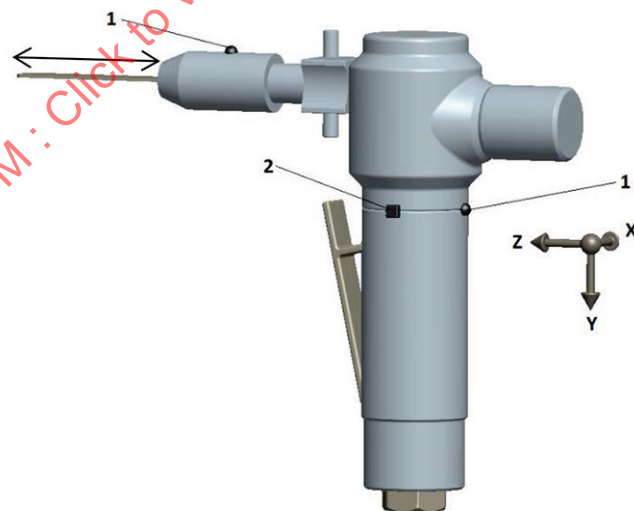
Measurement locations — Angle polishing/filing machine with reciprocating action - Designed for single hand held operation — Alternative design
